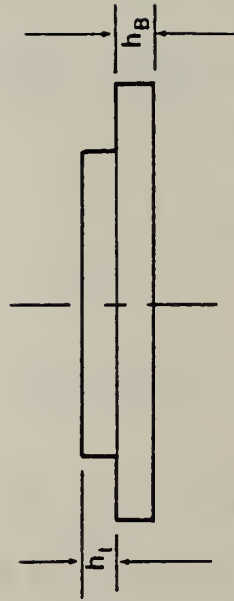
DIMENSIONS OF SPECIMEN MOUNTING PLATE.
